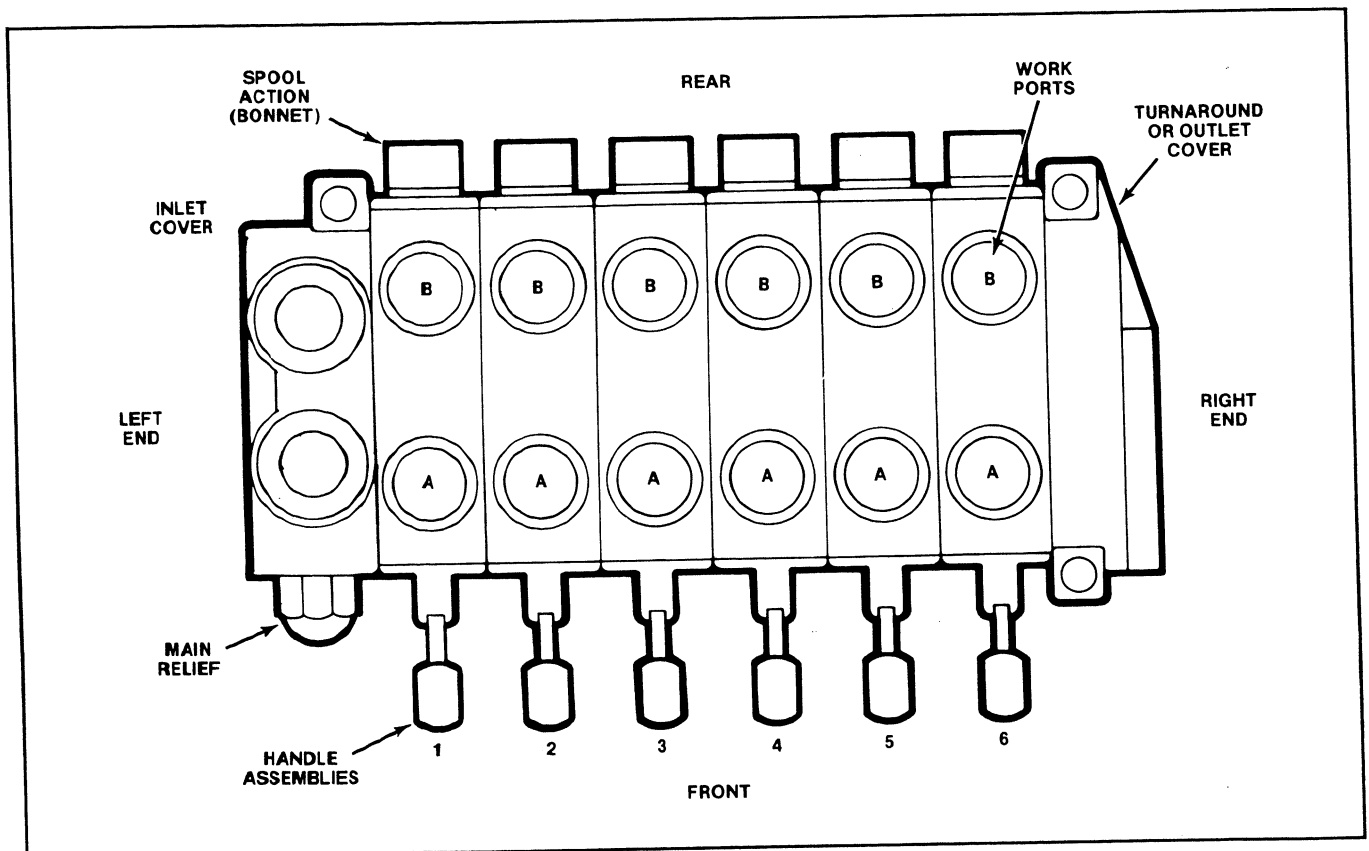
Schematic-View of Typical Control Valve Assembly.
